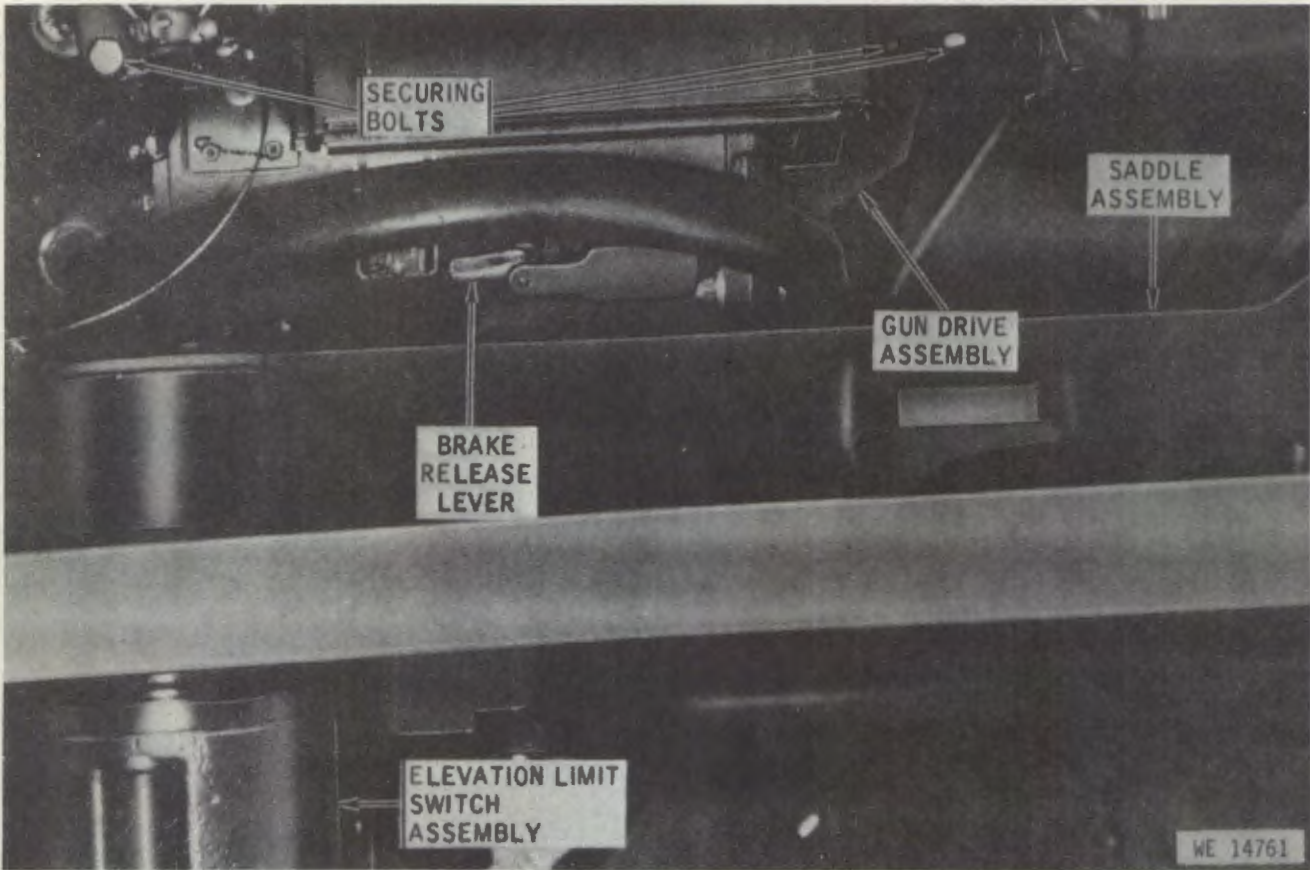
XM157 mount, top front view showing gun drive assembly.
